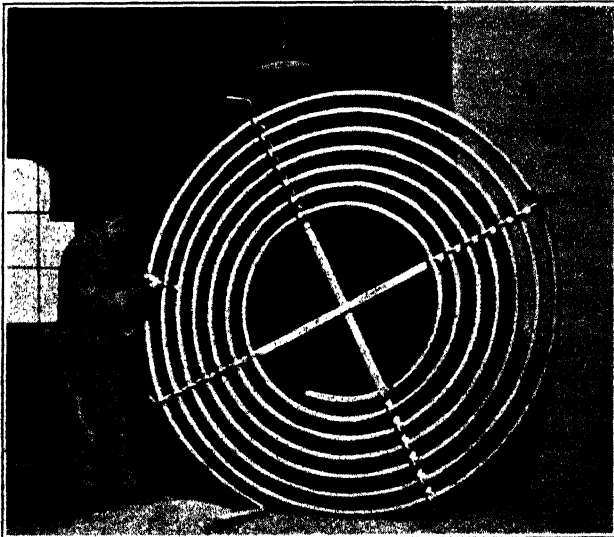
Metal Spraying a Coil used for Heating Large Evaporating Pans.
